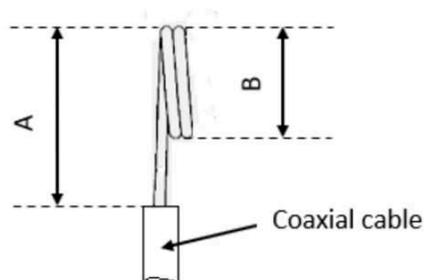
The helical antenna consists of two contiguous turns (dimension: $A = 2$ mm, $B = 1$ mm, conductor diameter = 0.53 mm).
